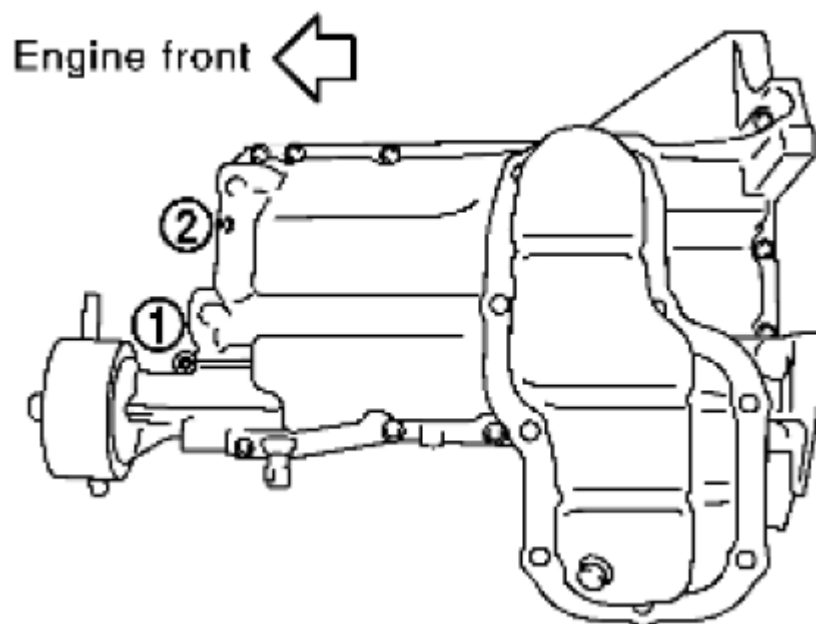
Identifying Oil Pan Bolts Install Sequence
